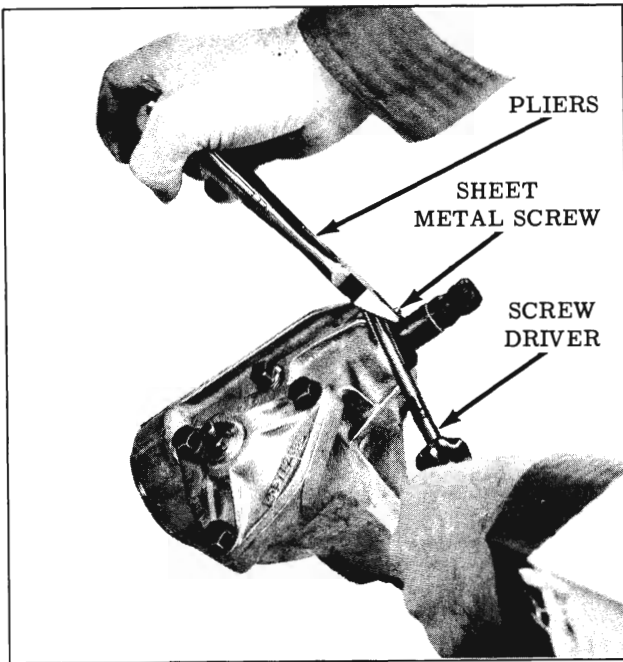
Worm Shaft Seal Replacement - Gear Assembled
